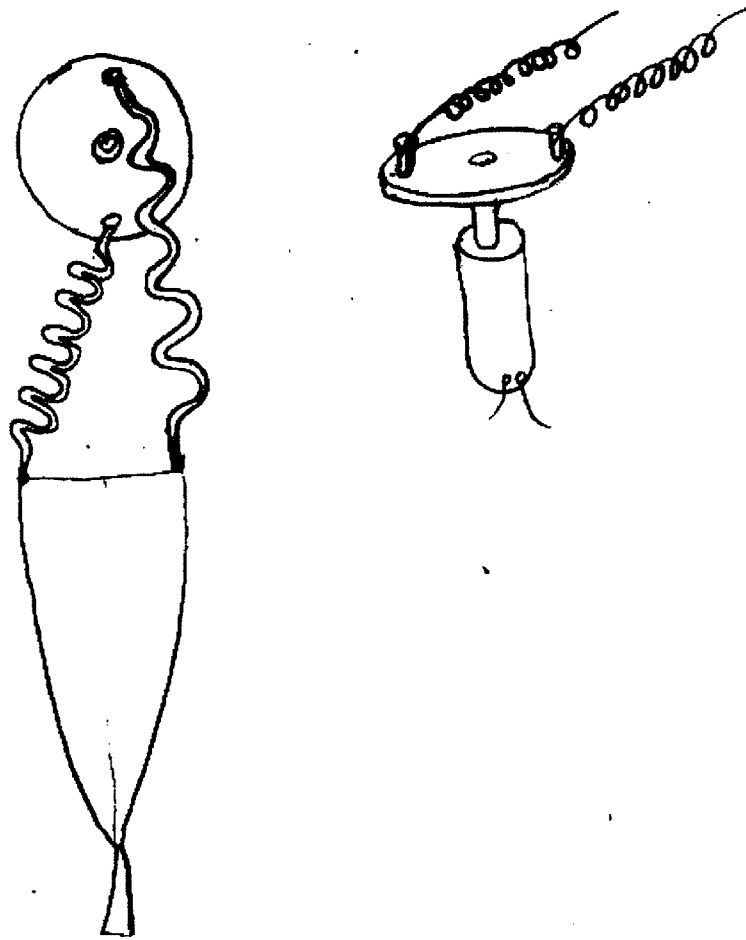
The crank-shaft transmissions are installed on the same side of the motor. The operation principle is the same as the previous one. Compared to the previous design idea, this design is more compact and doesn't require a double shaft motor.
